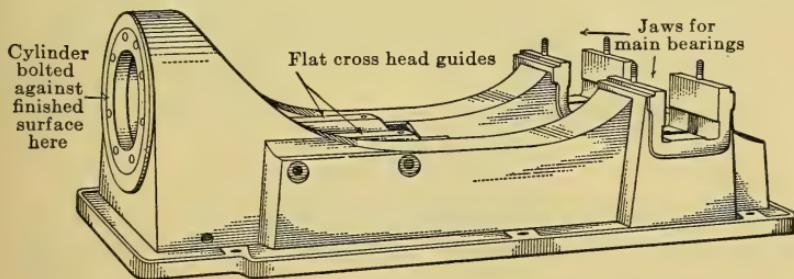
Frame for Medium Speed Center Crank Engine.
